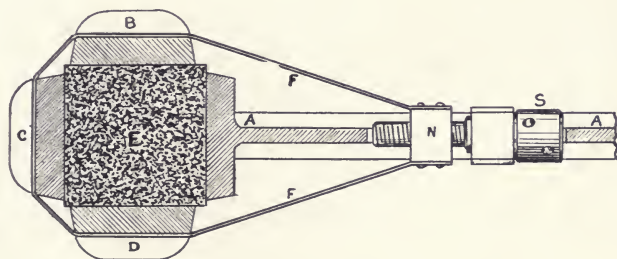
Electrode Holder of Heroult Steel Furnace.
